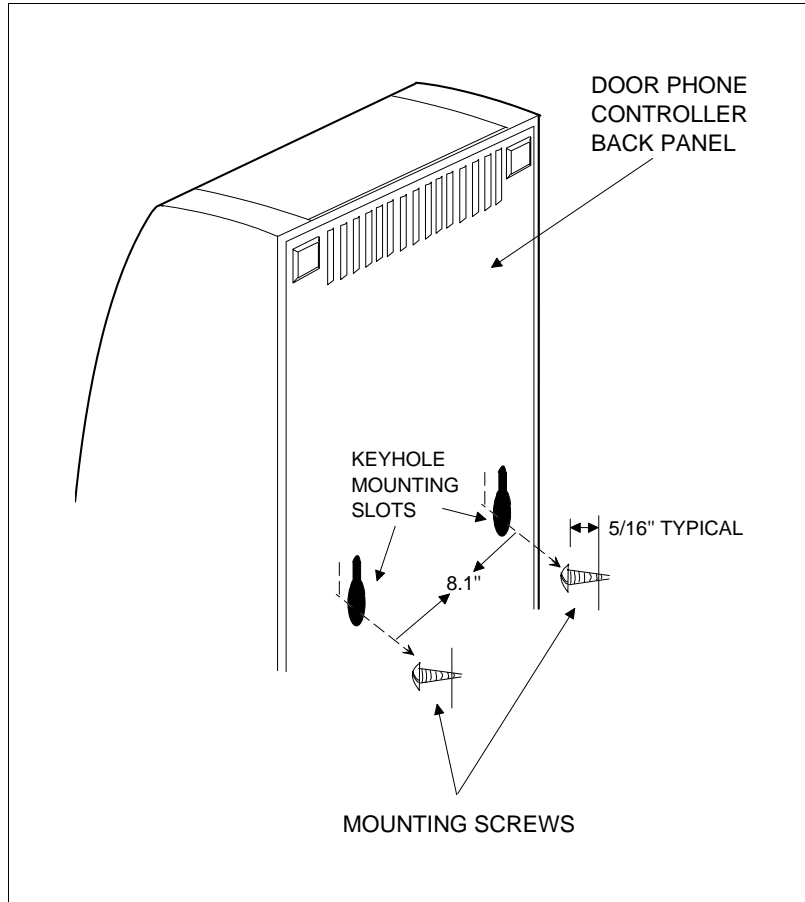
Mounting PagePac<sup>®</sup> Door Phone Controller to Wall
